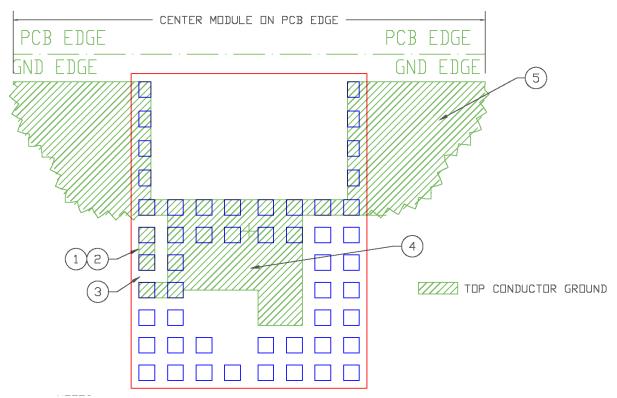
and 2 show proposed layout patterns for the RSL10 SIP. The specific layout pattern used in the application may have to be adjusted to meet certain needs of the PCB manufacturer or assembly house. PCB design files for the RSL10 SIP are available at www.onsemi.com.
